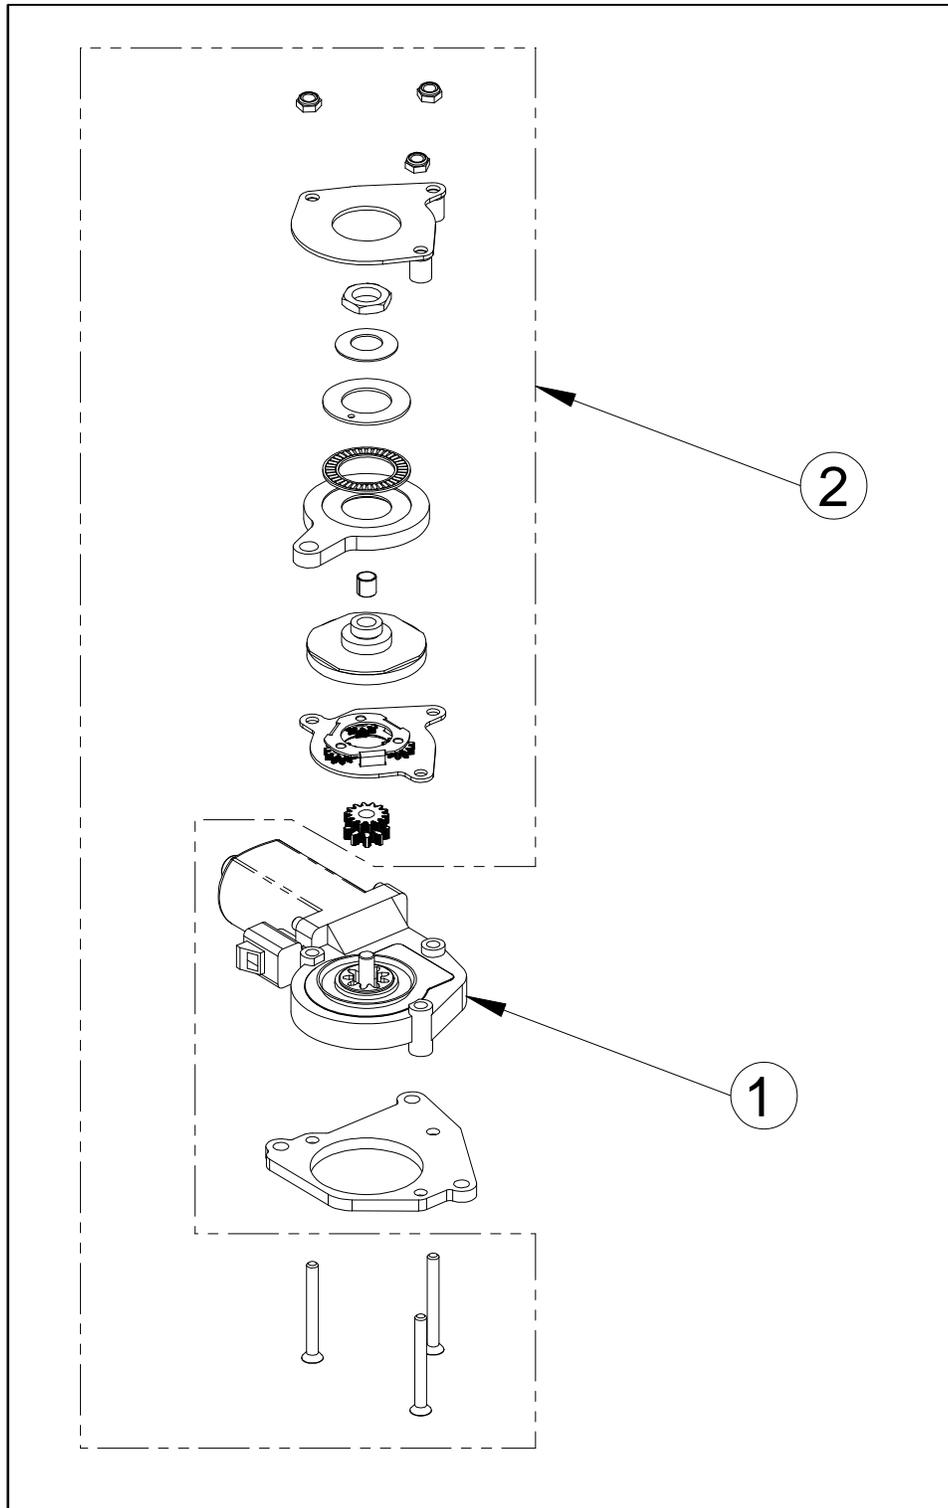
SIDE BARRIER MOTOR ASSEMBLY
